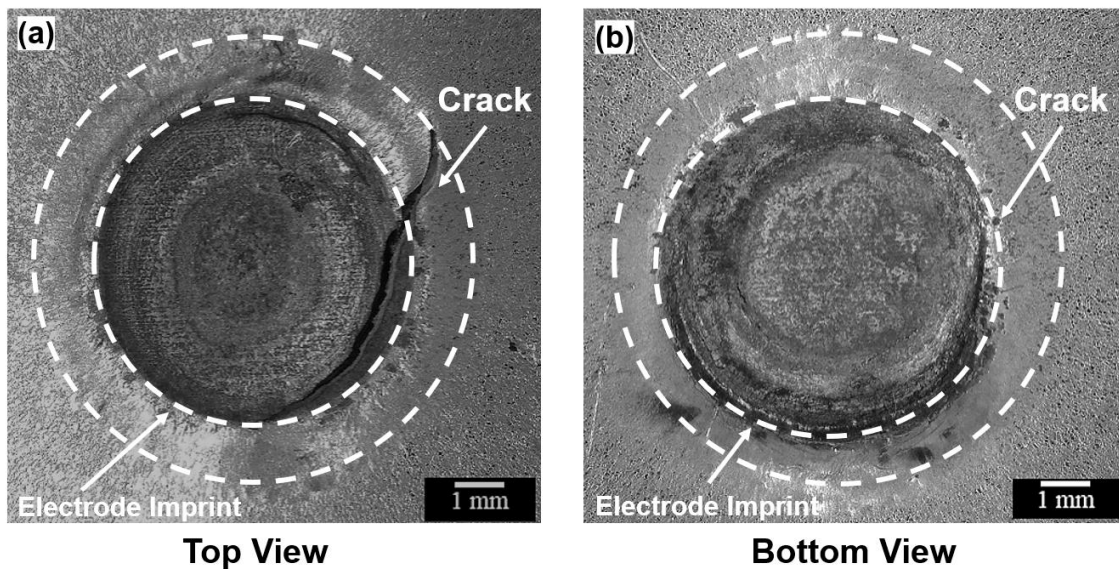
Overview of the weld nugget surface after interrupted CTS test of Q&P980. (a) Top View showing crack propagation around weld nugget (b) Bottom View
